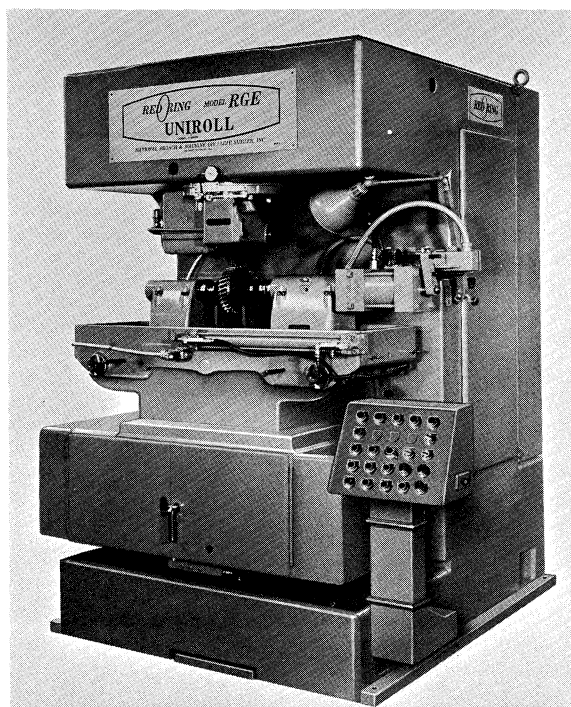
The Model RGE UNIROLL for low and medium production roll finishing.
